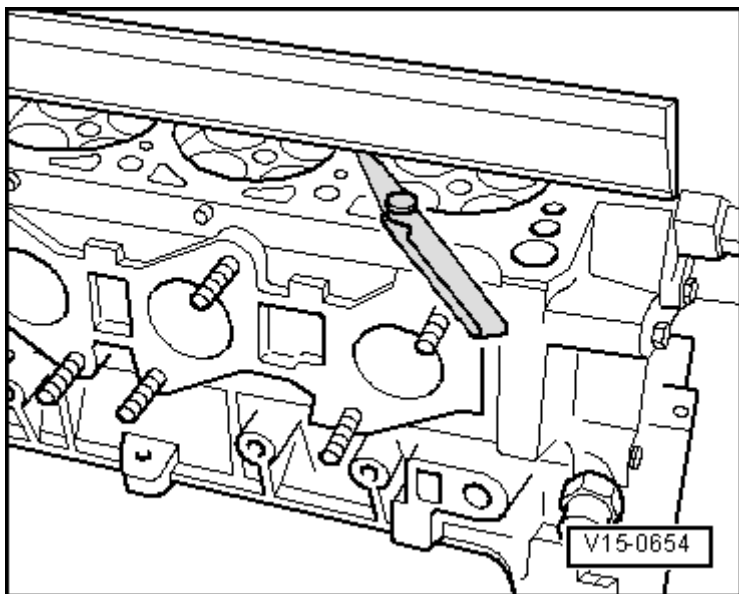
Identifying Check Of Cylinder Head For Distortion
